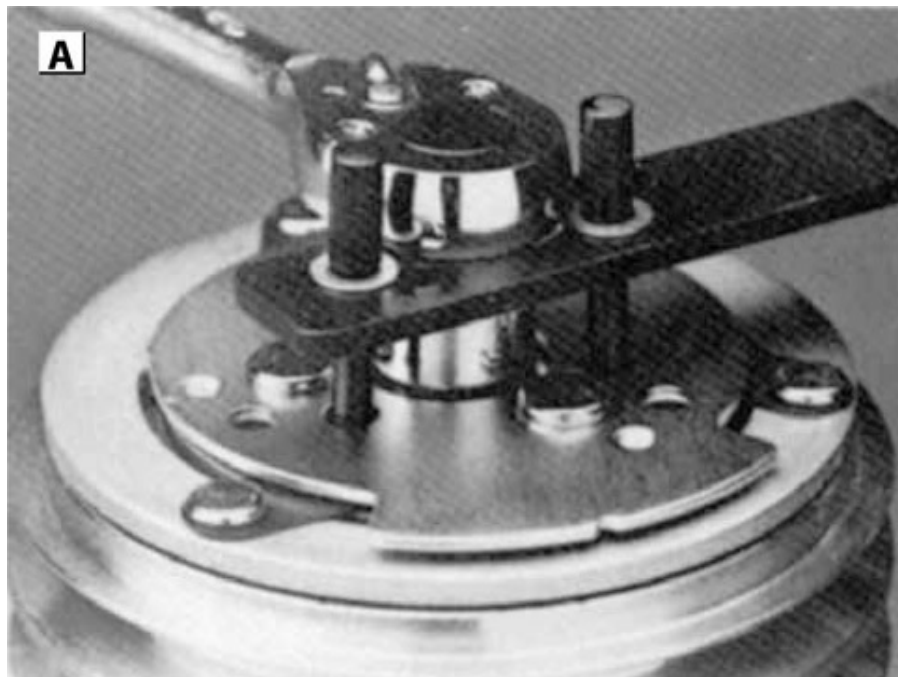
Special tools used in servicing Sanden compressors.
